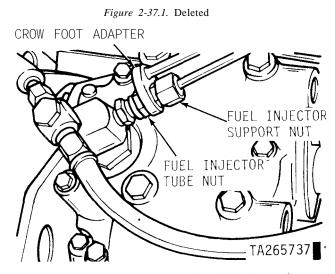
Disconnecting or connecting fuel injector tube nuts.
